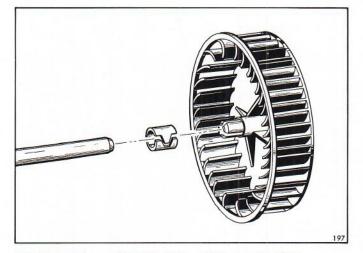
MOTOR FAN SHAFT AND FAN
